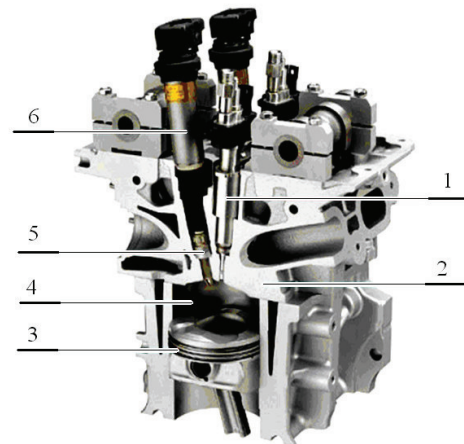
Combustion system of the engine N43B20 AY; 1 – fuel injector, 2 – engine head, 3 – piston, 4 – combustion chamber, 5 – spark plug, 6 – ignition coil [3]
